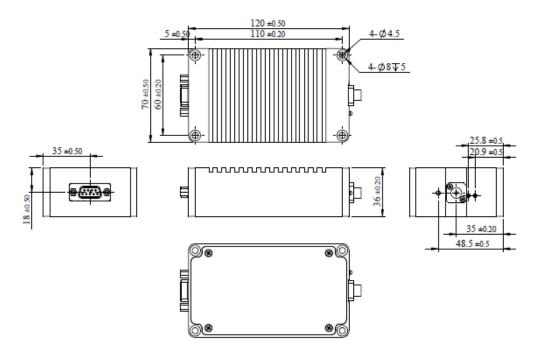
Mechanical drawing of IPSDW1321-0314 module
